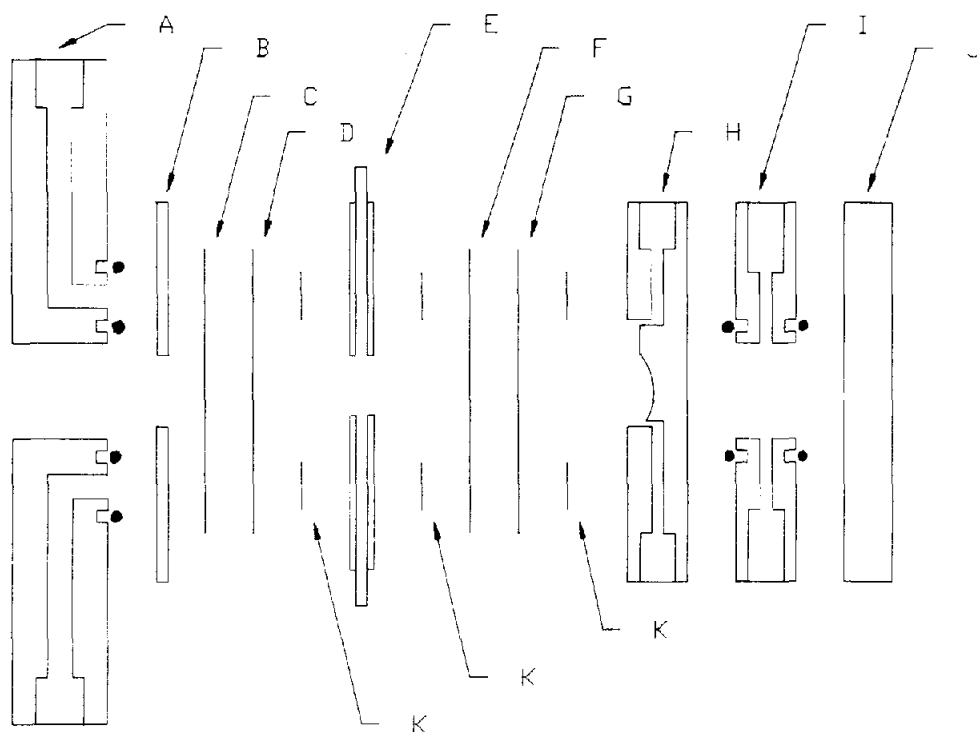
Exploded side view of double chamber target. A, Aluminum beamline mounting flange with water channels, O-rings and air jets (not shown) for foil cooling. B, Aluminum front target sealing plate. C, Havar foil 0.025 mm. D, Aluminum foil 0.05 mm. E, Aluminum front target body with SS fill and vent tubes shown. F, Aluminum foil 0.25 mm, or Havar 0.025 mm. G, Silver foil 0.025 mm. H, Silver back target body fill and vent ports. I, Aluminum disk for circulating cooled water showing inlet and outlets. J, Aluminum back plate. K, Silver crush seals (0.25 mm).
